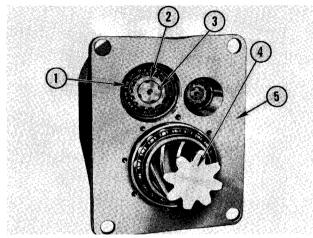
RETAINER, REMOVED 5. Case 1. Bearing 3. Setscrew Pinion 2. Locknut 4.
